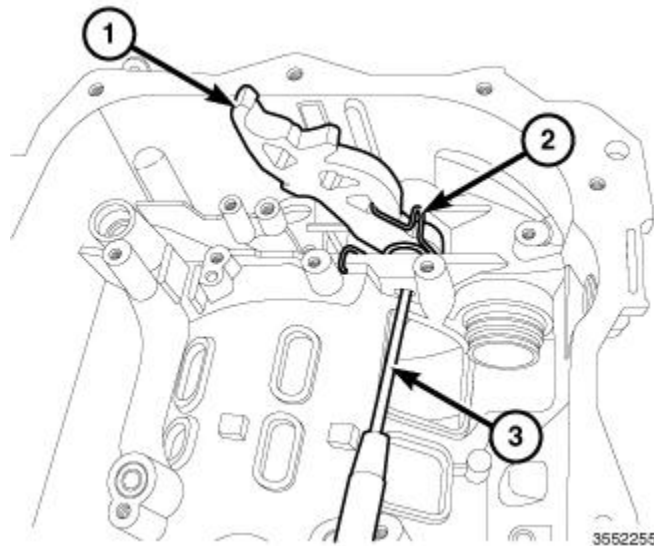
Removing/Installing Park Pawl Shaft Using A Suitable Pin Punch, Park Pawl And Spring
